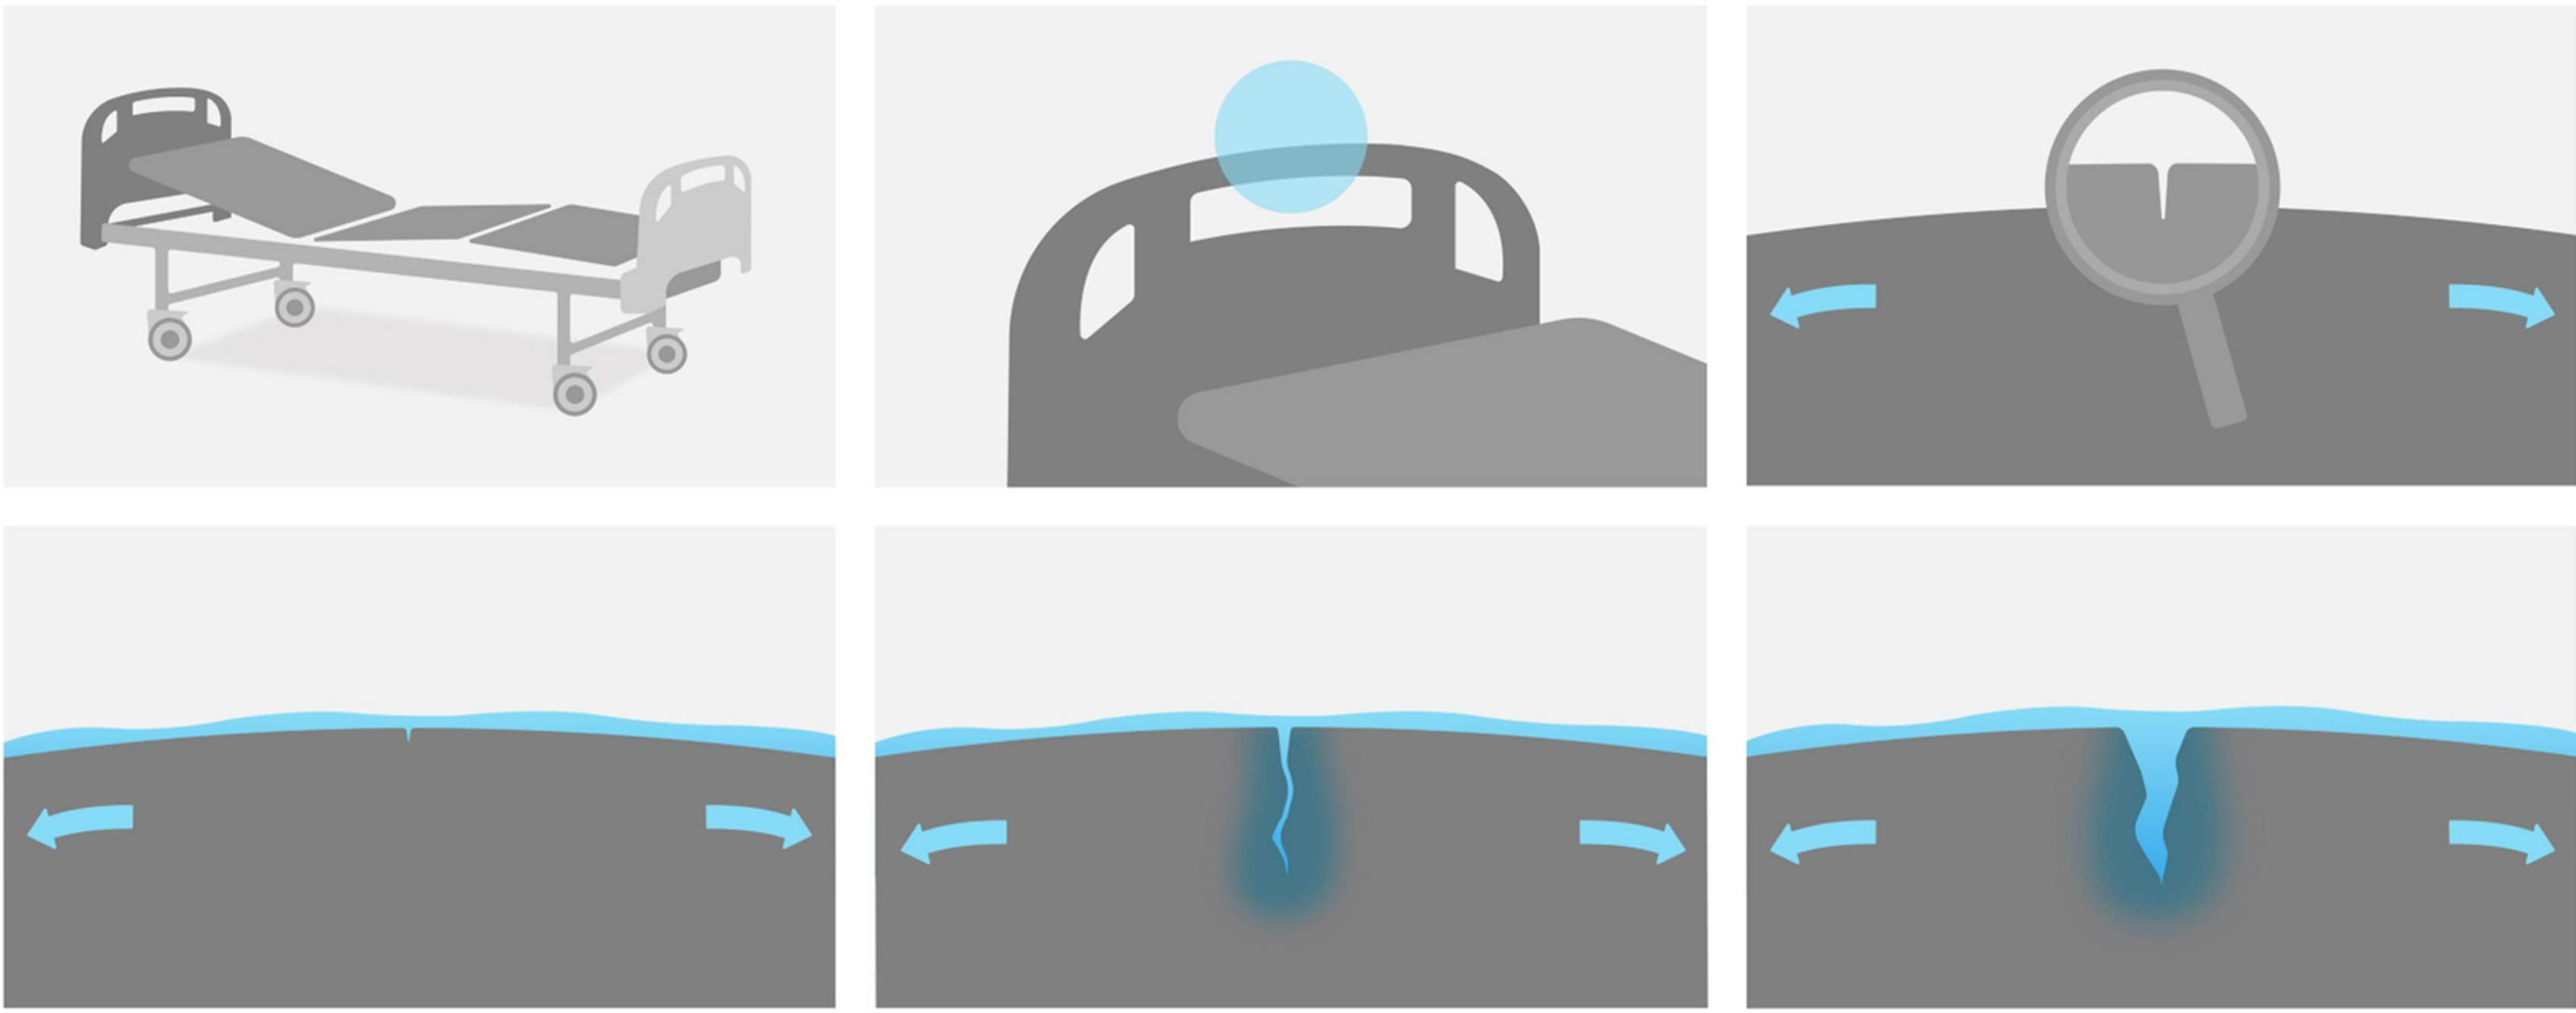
Strain is locked into moulded components during manufacture. Fluid containing ESC agents enters microscopic surface flaws and, over repeated exposures, drives them into visible cracks.
